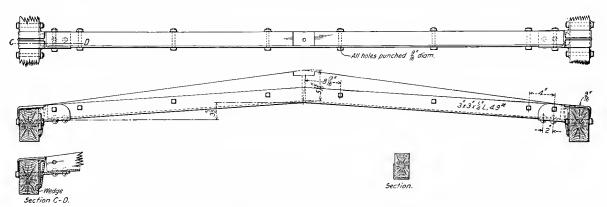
Steel Angle Roof Carline. Standard Railway Equipment Company.
